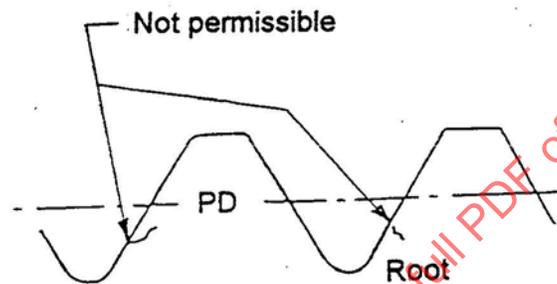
LAPS BELOW PD EXTENDING IN ANY DIRECTION, ROLLED THREAD
